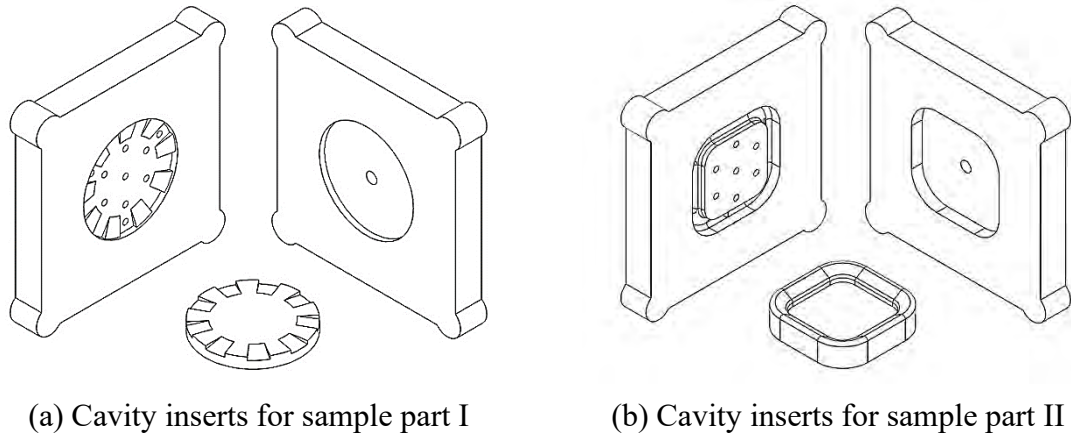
Sets of single cavity inserts for molding two different sample parts
